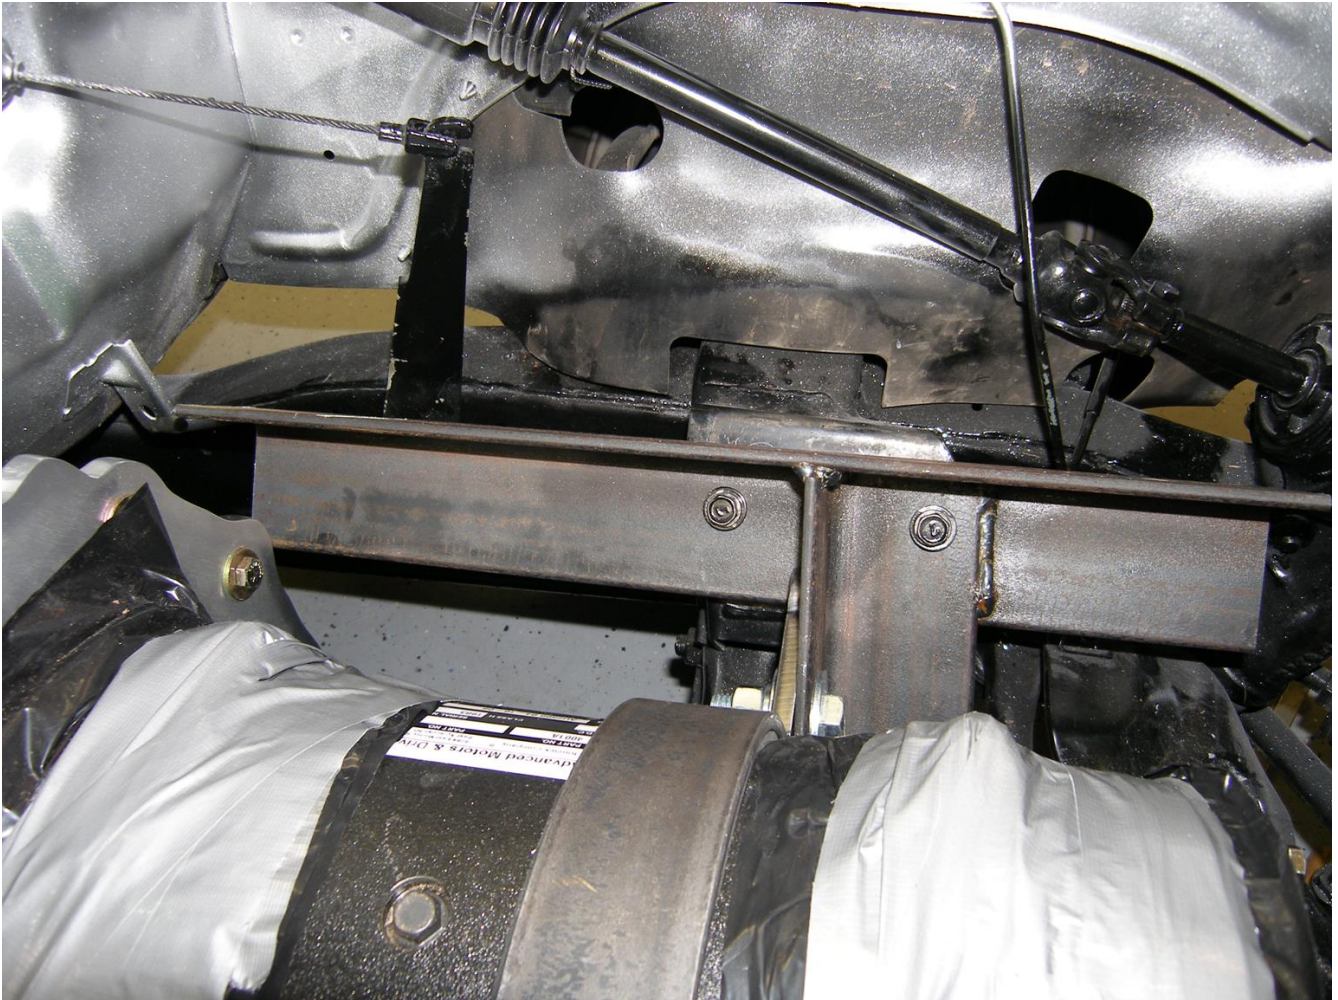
11 Showing bolts in place from base plate to existing Isuzu flat plus the lower motor tab bolt.
